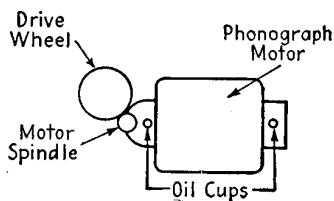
Rim-drive phonograph motor, showing location of oil cups.
